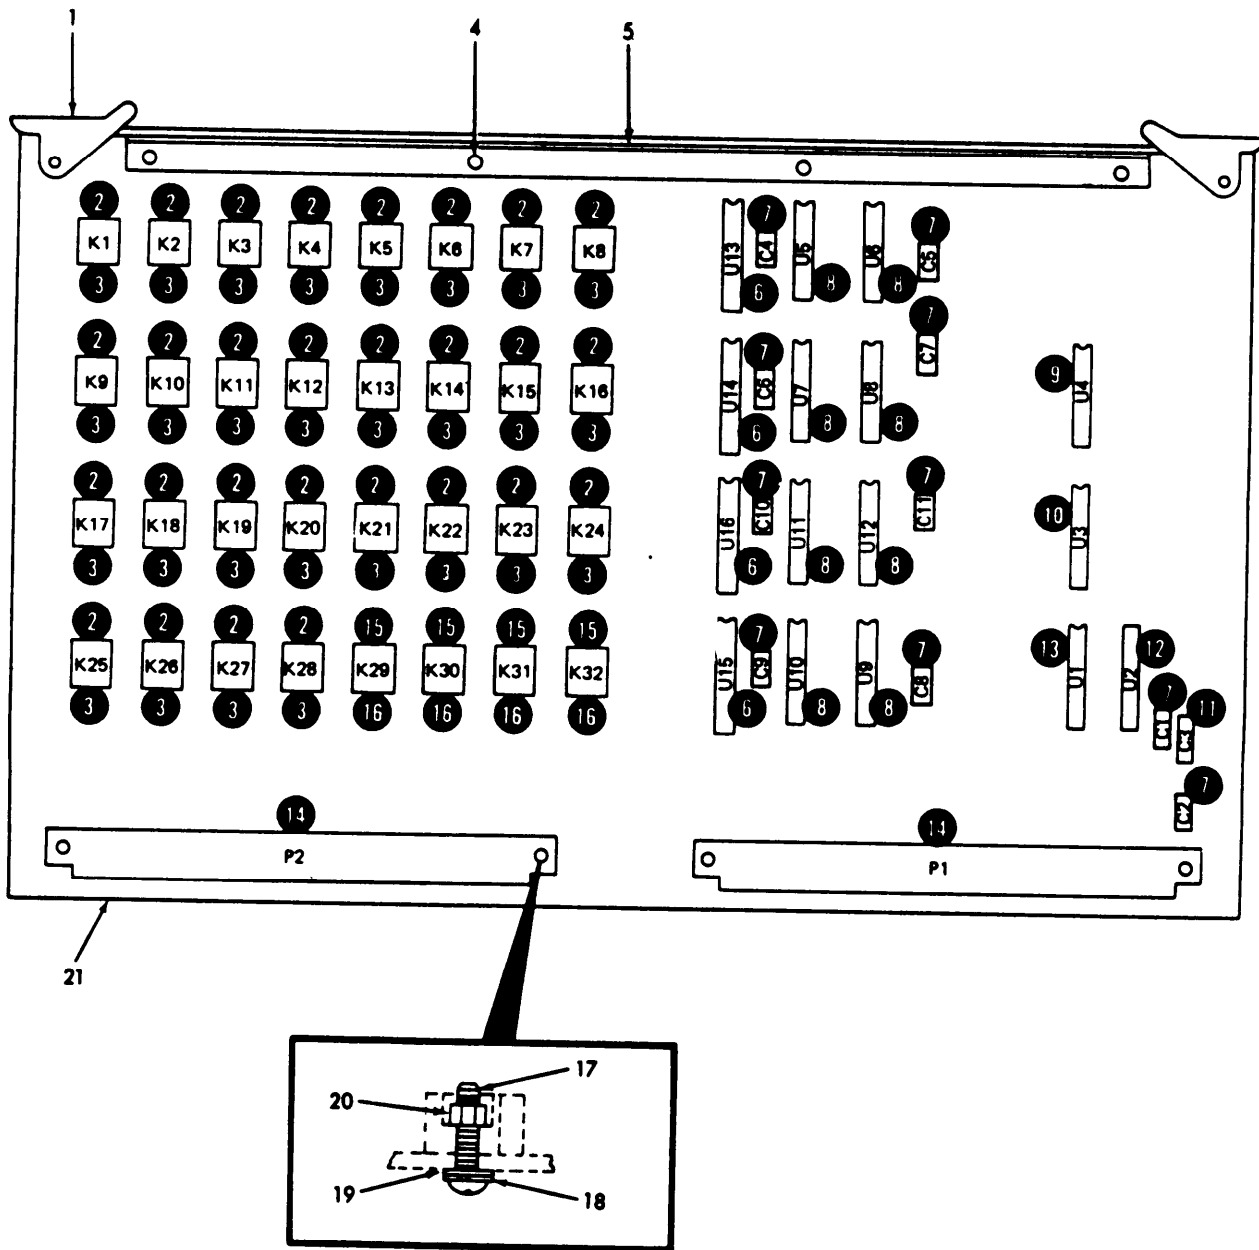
STIMULI CIRCUIT CARD ASSEMBLY A9, A10
